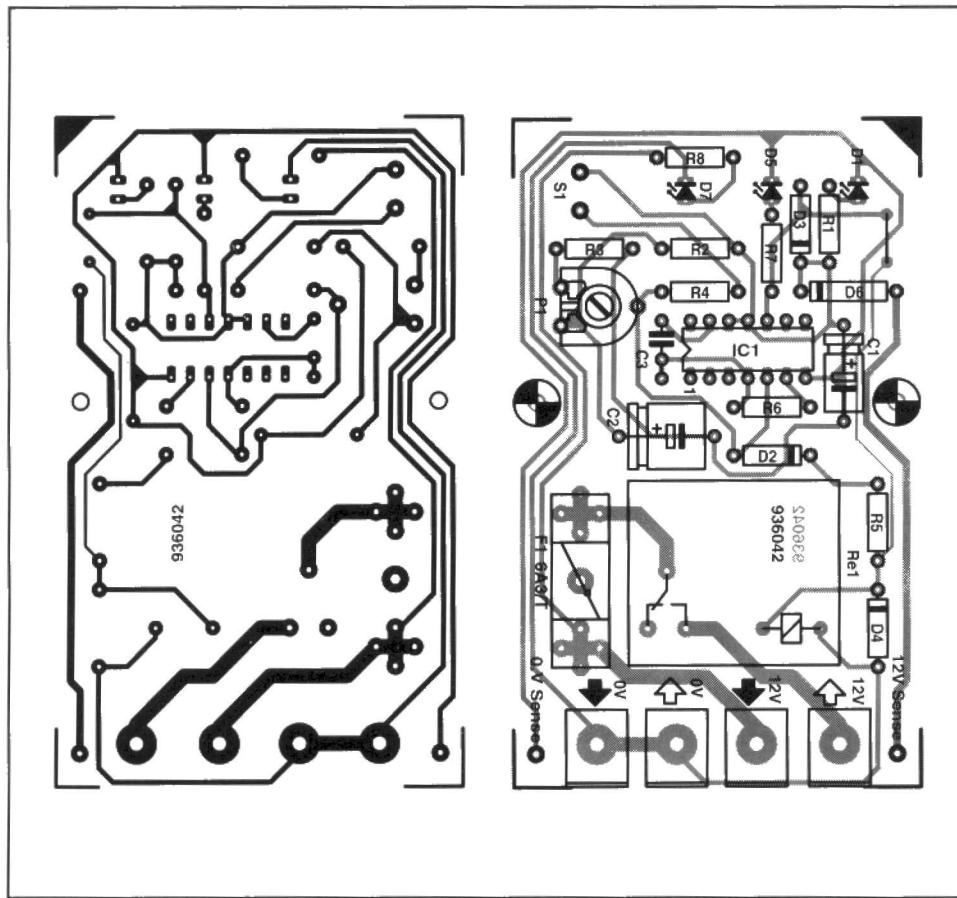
Track layout (direct reading) and component overlay of the PCB designed for the battery monitor (PCB not available ready-made through the Readers Services).
